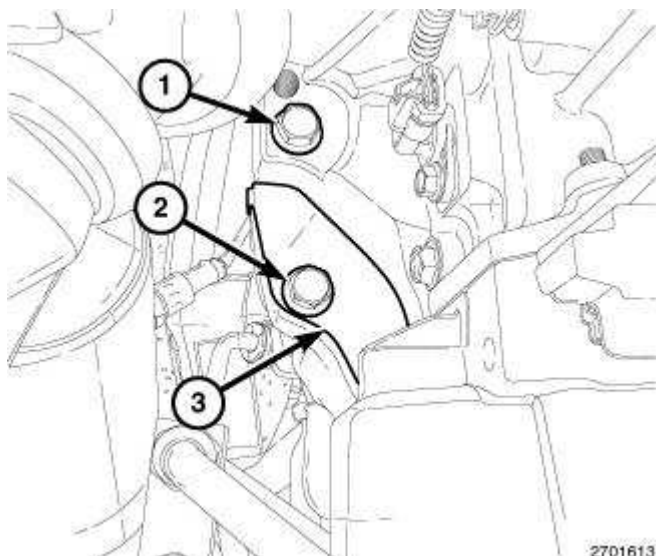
Side Engine-To-Transmission Bolt, Transmission Dust Shield Retaining Bolt & Dust Shield
